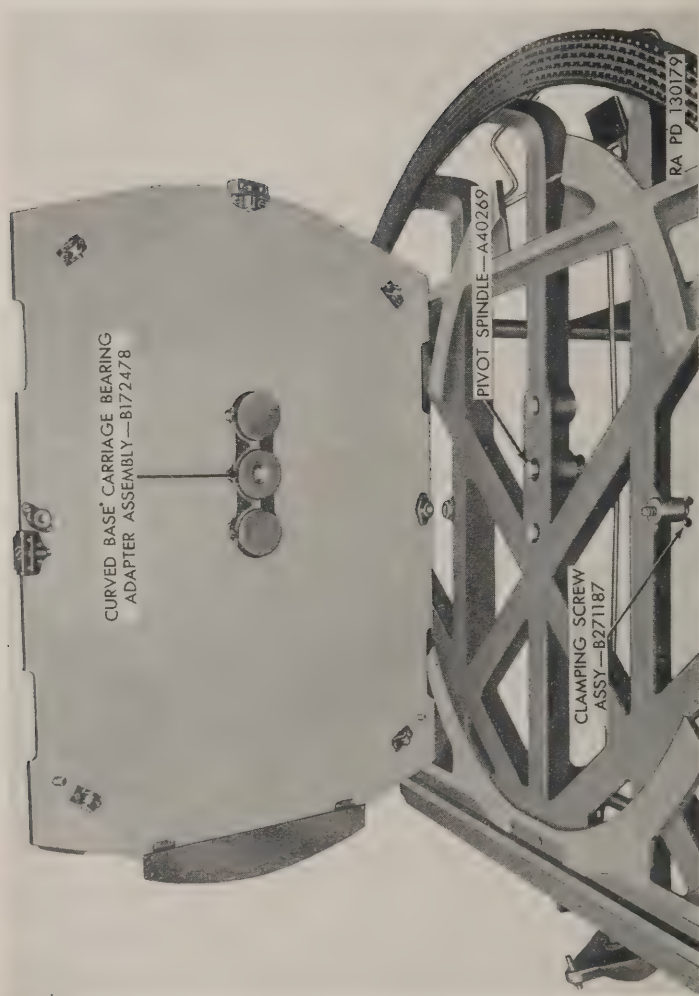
Curved-base carriage assembly with carriage tilted away from frame—sound-ranging plotting board M1 or M1A1.
